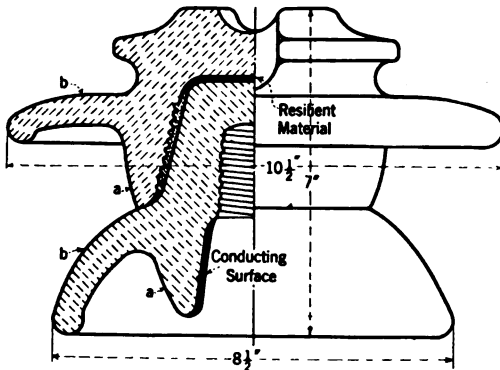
B—TWO-PIECE INSULATOR OF THE PROPOSED TYPE OF DESIGN
